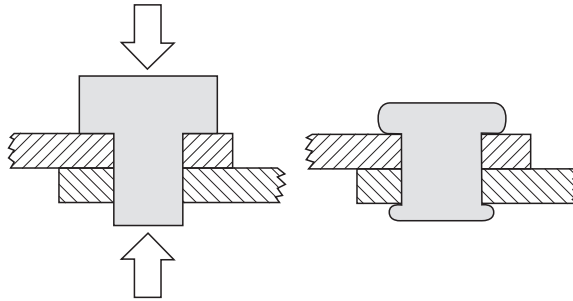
Using a rivet to fasten two sheets of material.
